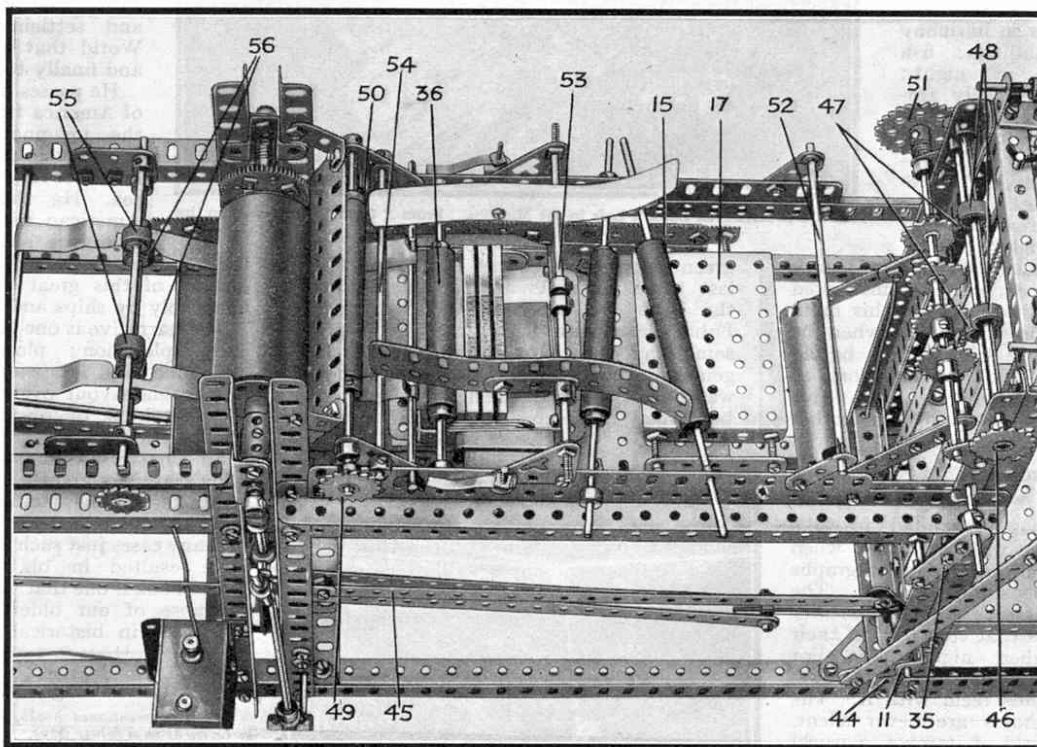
This view of the machine shows clearly the inking and delivery rollers. The delivery chains have been omitted in order to show the arrangement more clearly.
